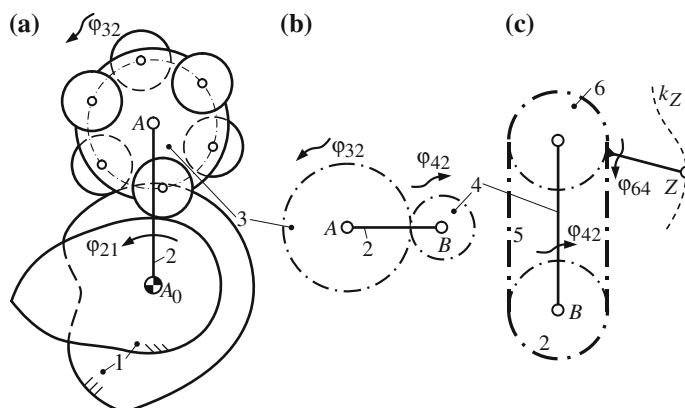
Separating device-components of a packaging-machine for separating issues. a planetary cam-mechanisms, b spur gear ($i = 2 = \text{constant}$), c belt-drive ($i = 1 = \text{constant}$)
